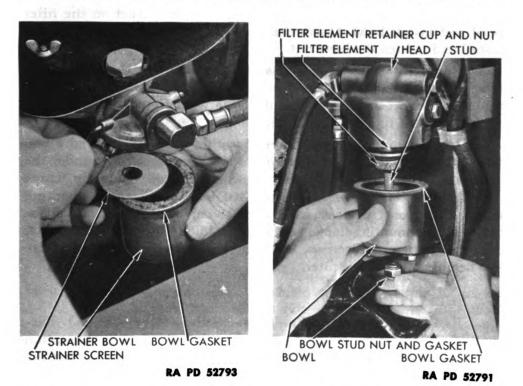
Removing Fuel Pump Figure 87—Removing Fuel Line Bowl and Strainer Screen Filter Element
